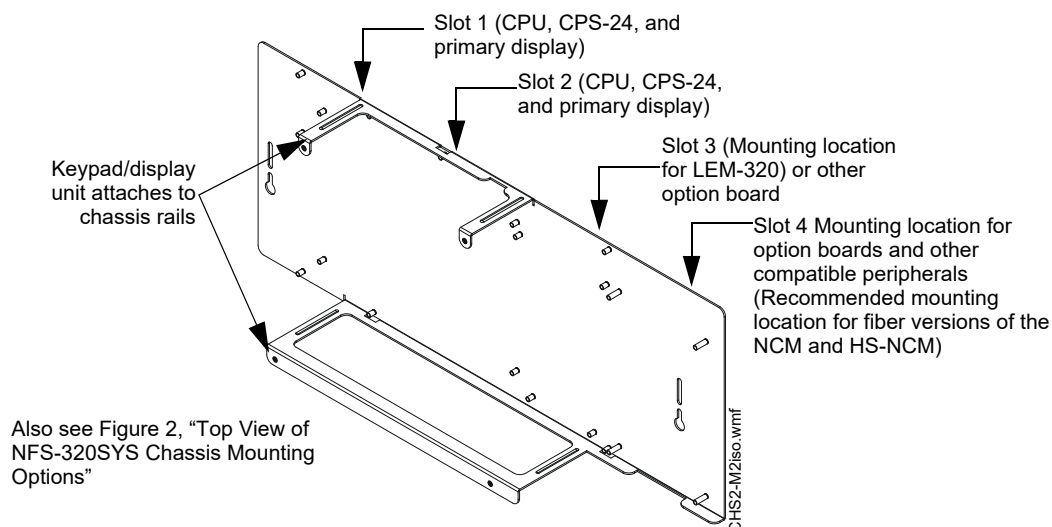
Side View of the NFS-320SYS Chassis Mounting Options
